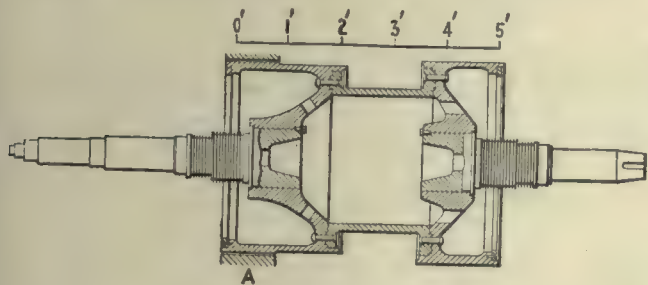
DRUM TYPE ROTOR WITH TWO BEARINGS
